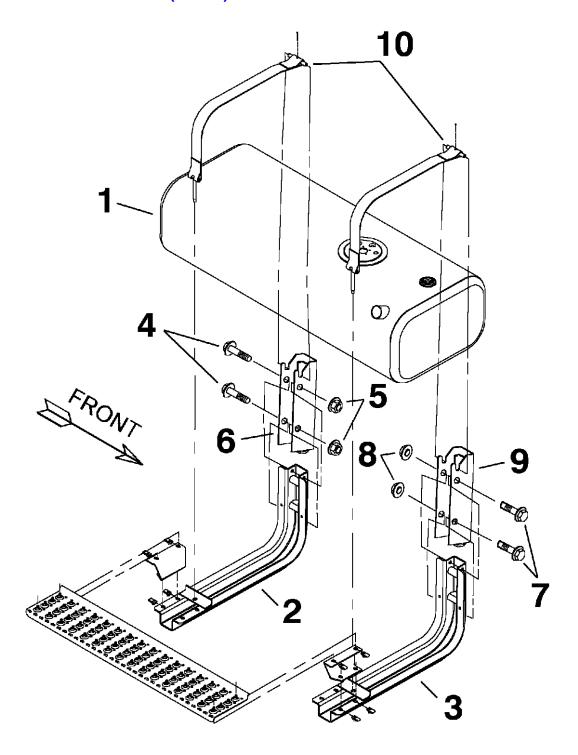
Removing 65 Gallon One Step Fuel Tank Module
